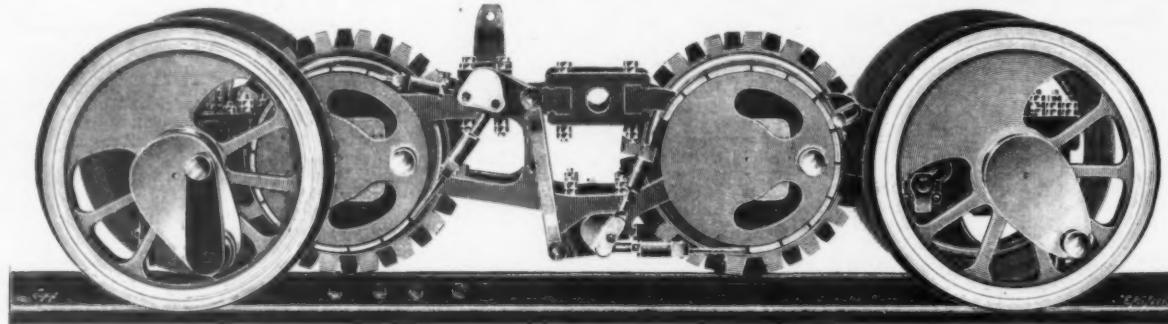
TOOTH GEARING OF RACK AND RAIL LOCOMOTIVE—BOSNIA AND HERZEGOVINA RAILWAY.
